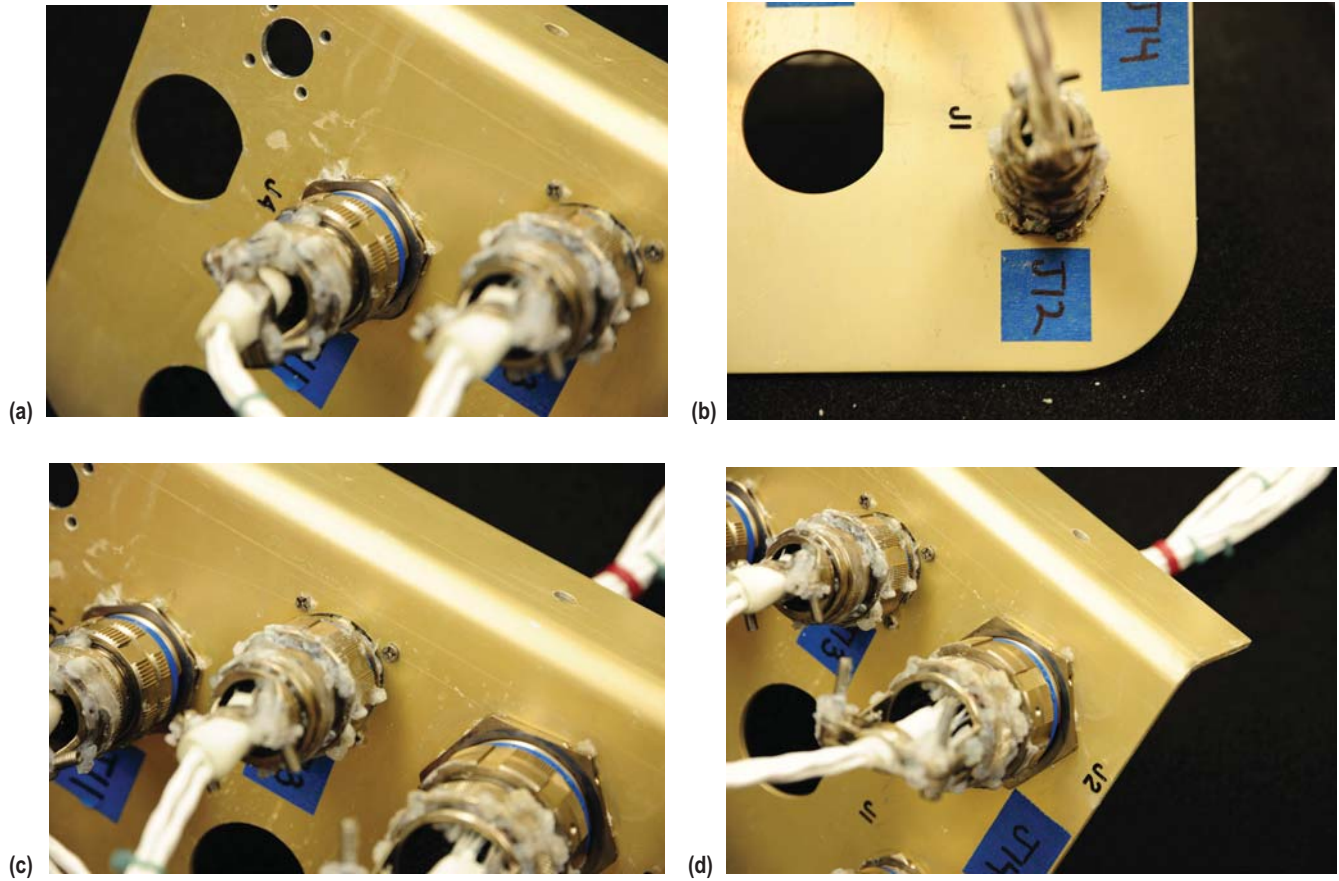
Each of the four plugs at the interface between the plug connector and the receptacle connector after removal from the salt spray test chamber: (a) P11, (b) P12, (c) P13, and (d) P14.
